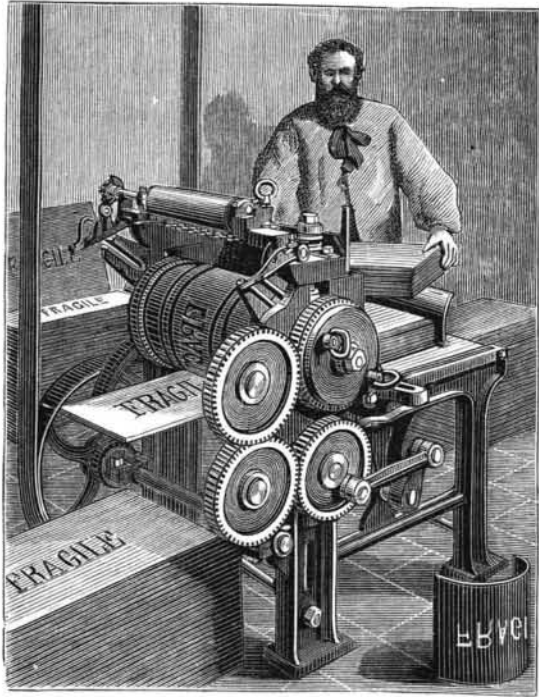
MACHINE FOR PRINTING ON WOOD.
